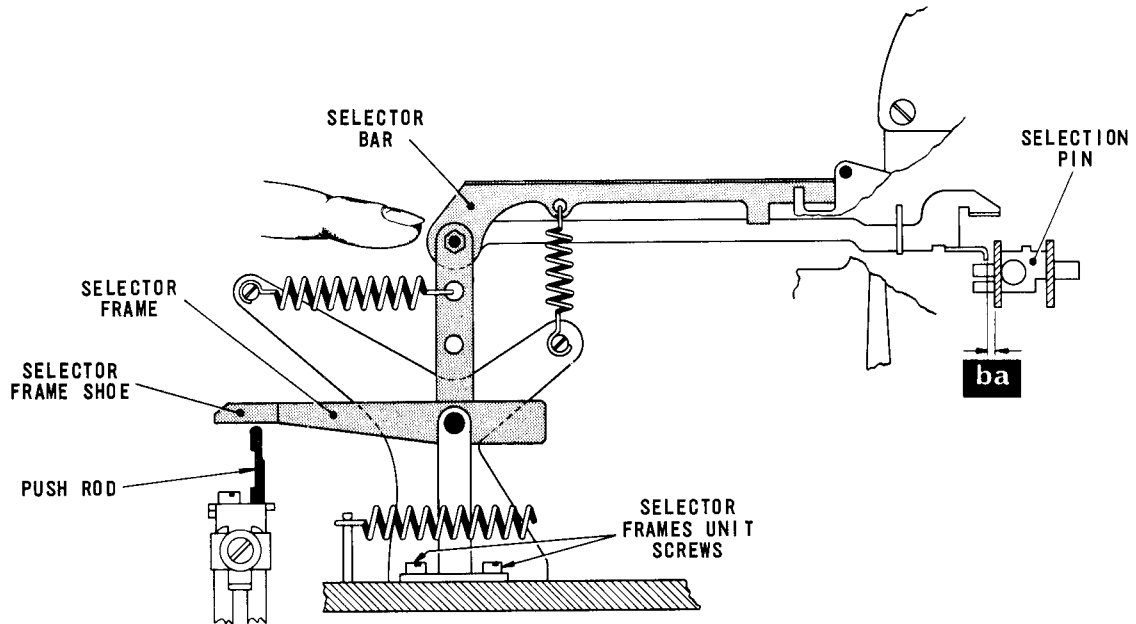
SELECTOR BAR/SELECTION PIN CLEARANCE
